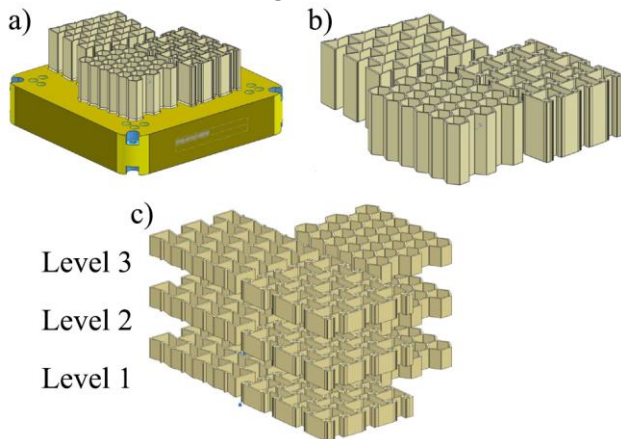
Three stages of the specimens: a) after printing, before removing from build plate, b) after removing build plate, before cutting into three parts, c) after cutting into three parts.
